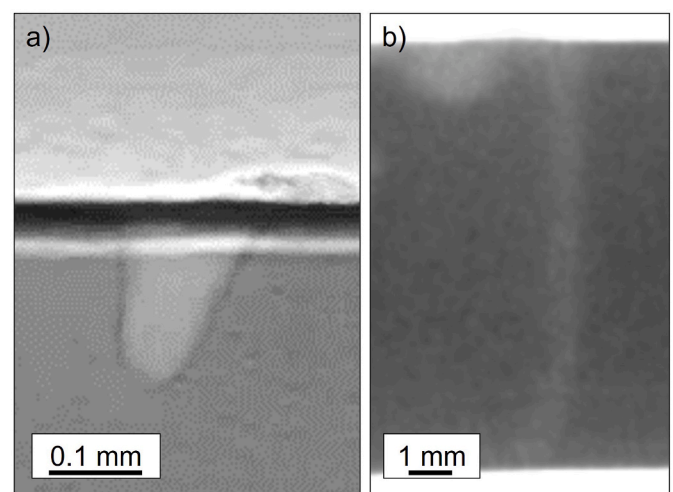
Keyhole shape appearance examples in high-speed X-ray images of partial penetration welding at a) Argonne National Lab and b) Osaka university.
